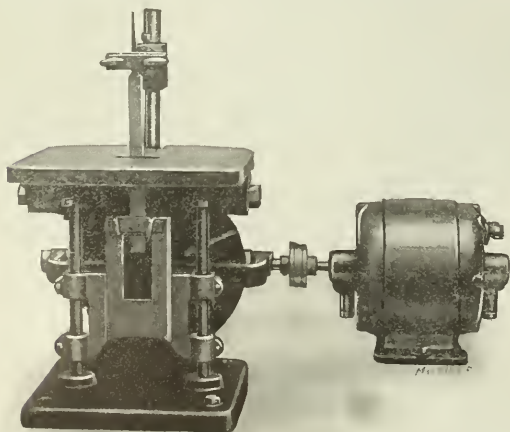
Front View of Filing Machine built by Holmes Mfg. Co.
